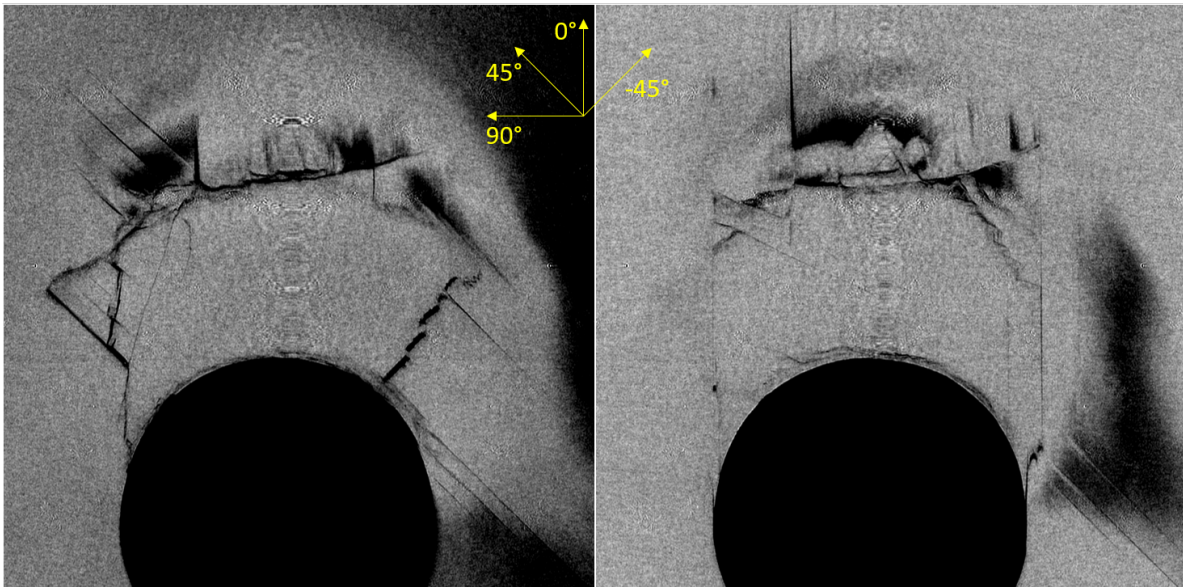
CT scan of Test 3. Left: Ply 1. Matrix cracking, fiber crushing above washer footprint, and fiber cracking top right of hole. Right: Ply 2. Matrix cracking tangent to hole and fiber crushing above washer footprint.
